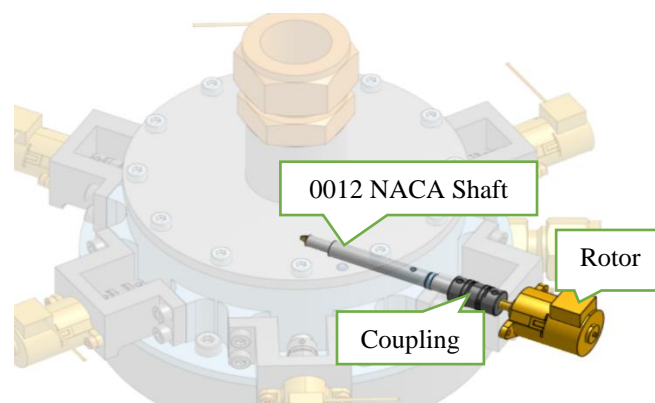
Parts involved in transmitting the movement of the motor stepper to the vane
